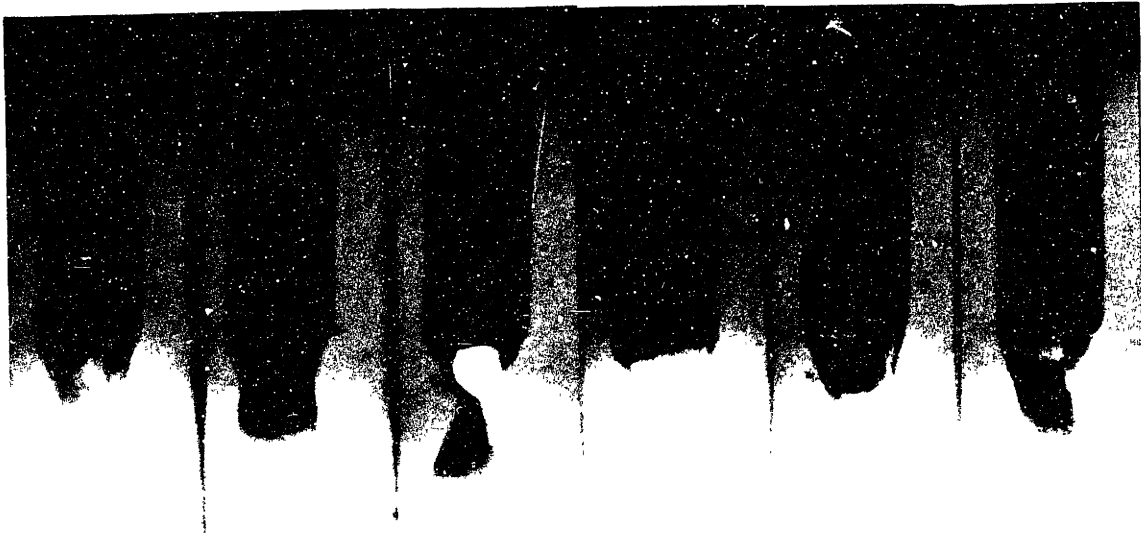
Aluminum weld metal transfer with $f = 50$ Hz
